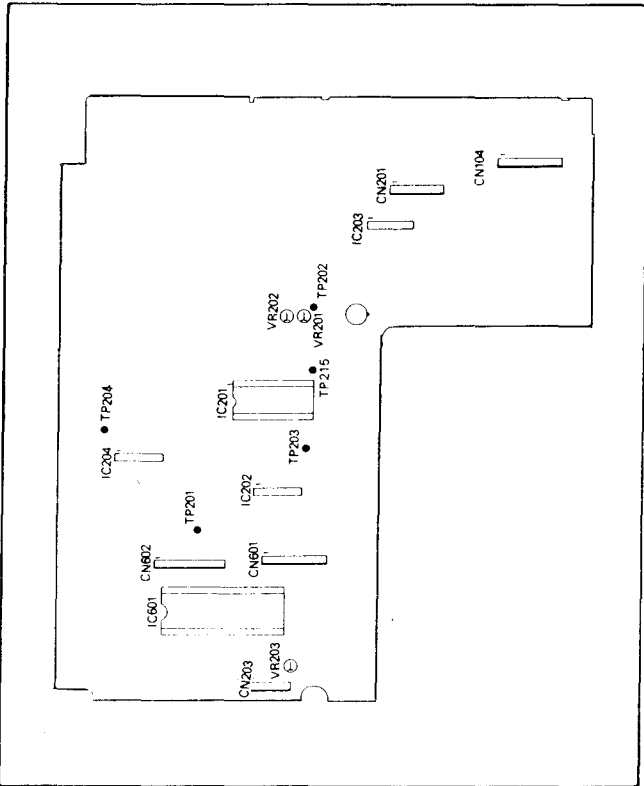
SERVO SECTION in Main A PCB-Component Side
